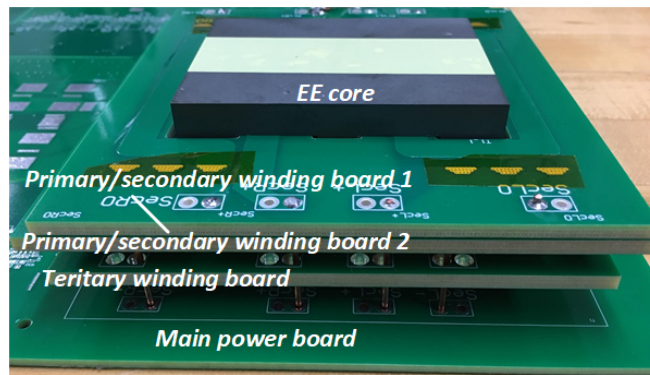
The assembled integrated planar transformer with the main power board.
